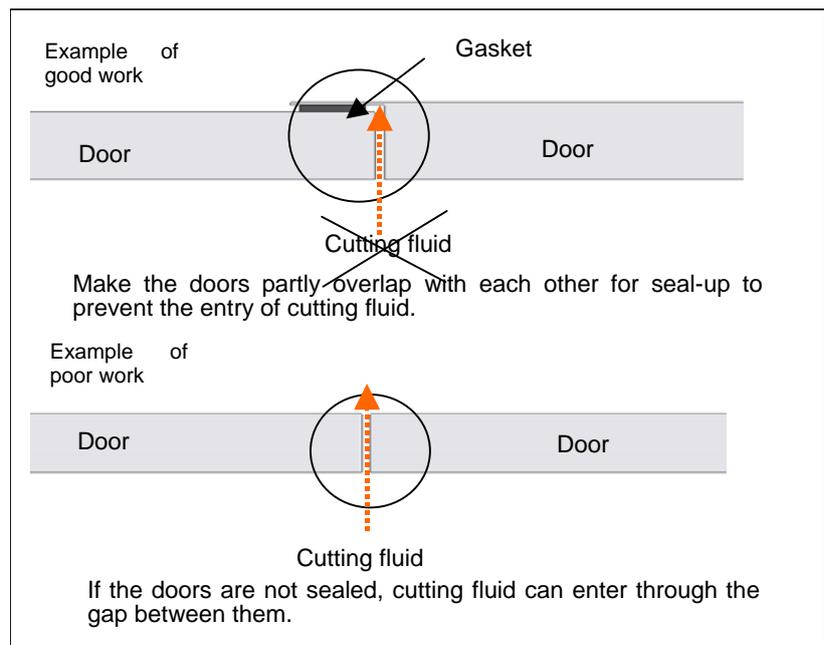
Double-door structure seal-up (cross-section view of portion where the doors meet)
